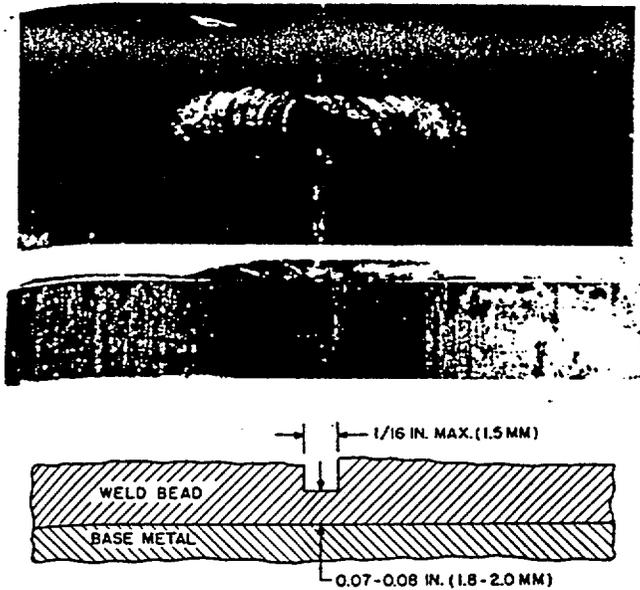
Weld-Notch Details and Example of a Notched Weld
